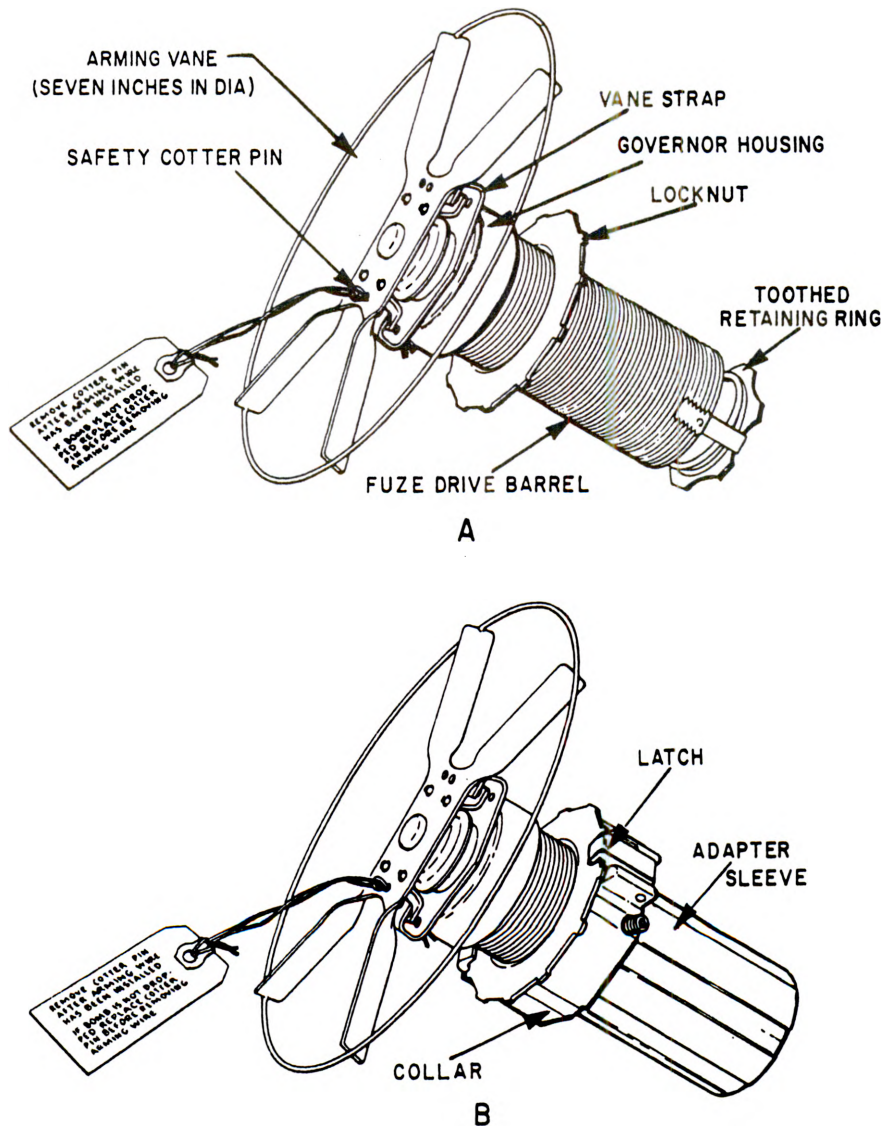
View A, fuze drive Mk 5 Mod 0; view B, fuze drive Mk 5 Mod 0 with adapter.
